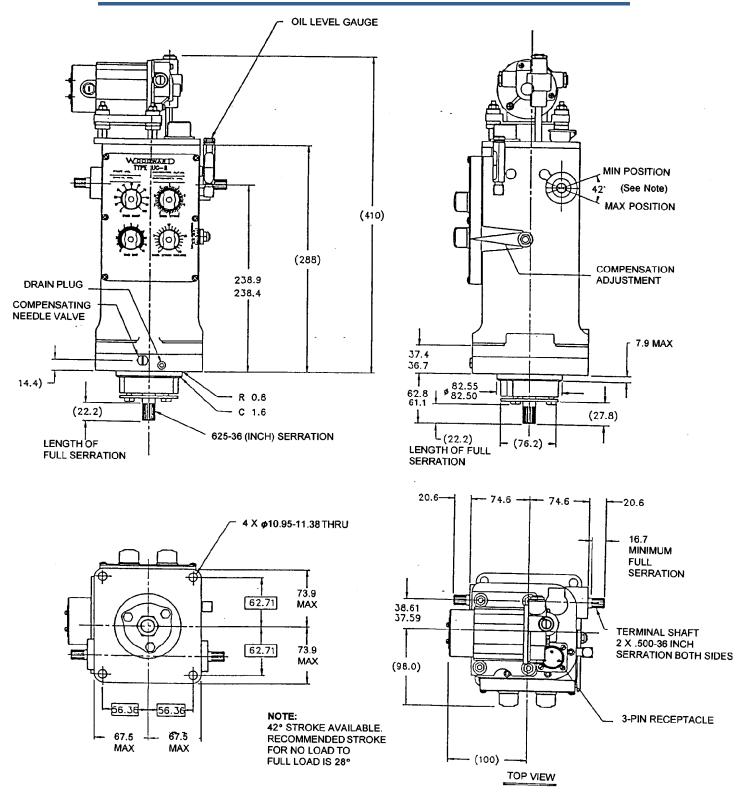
Outline Drawing of UG-8D (5.7 or 12.8) Governor with Vibration-Resistant Motor Cover
